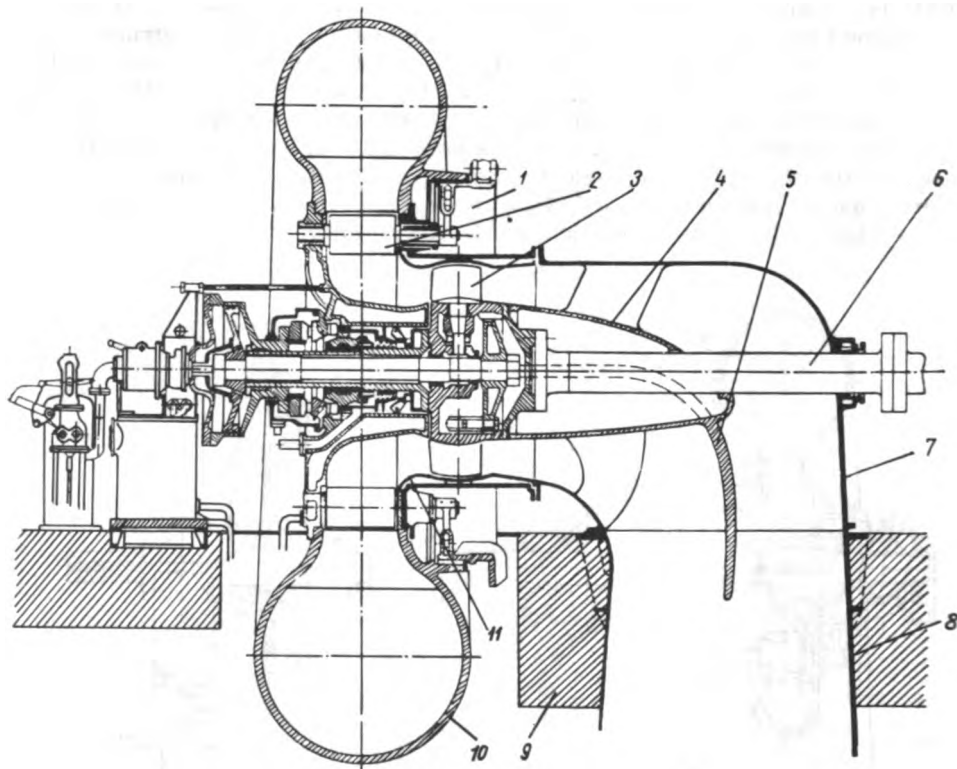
Sectional view of a horizontal-shaft Kaplan turbine for $N = 3680$ kw and $H = 56$ m
